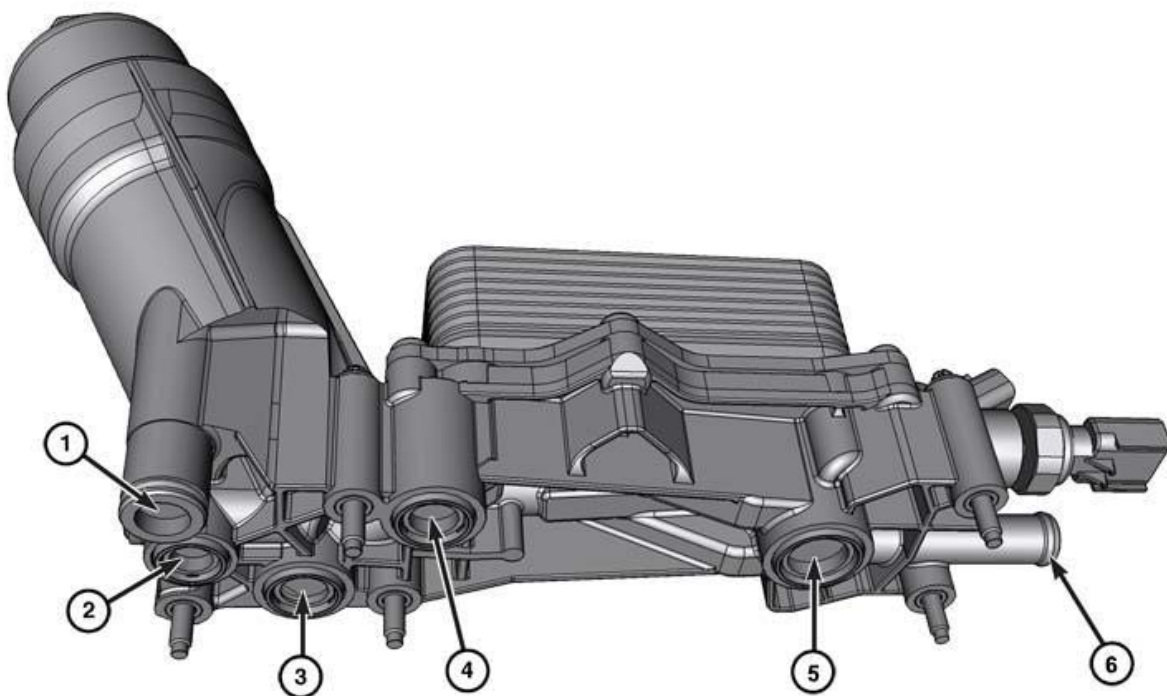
Oil Filter Housing & Engine Oil Cooler
